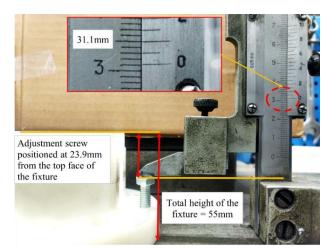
The face-to-face dimension of DN65-DN80 bodies is 47.8mm and fastening the height adjustment screw at 23.9mm from the top face of the disc fixture, assures that the shaft holes of the body and disc are accurately aligned.
